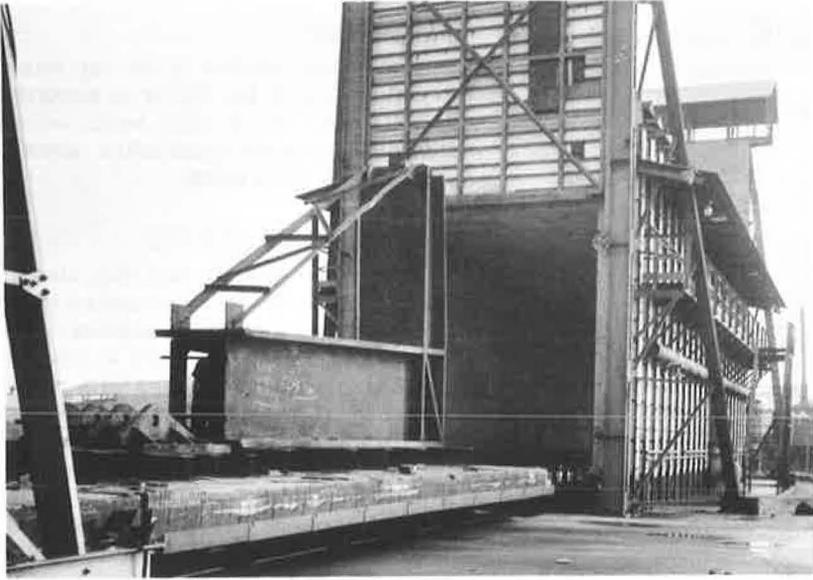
Knee section and base plates after post-weld heat treatment.
